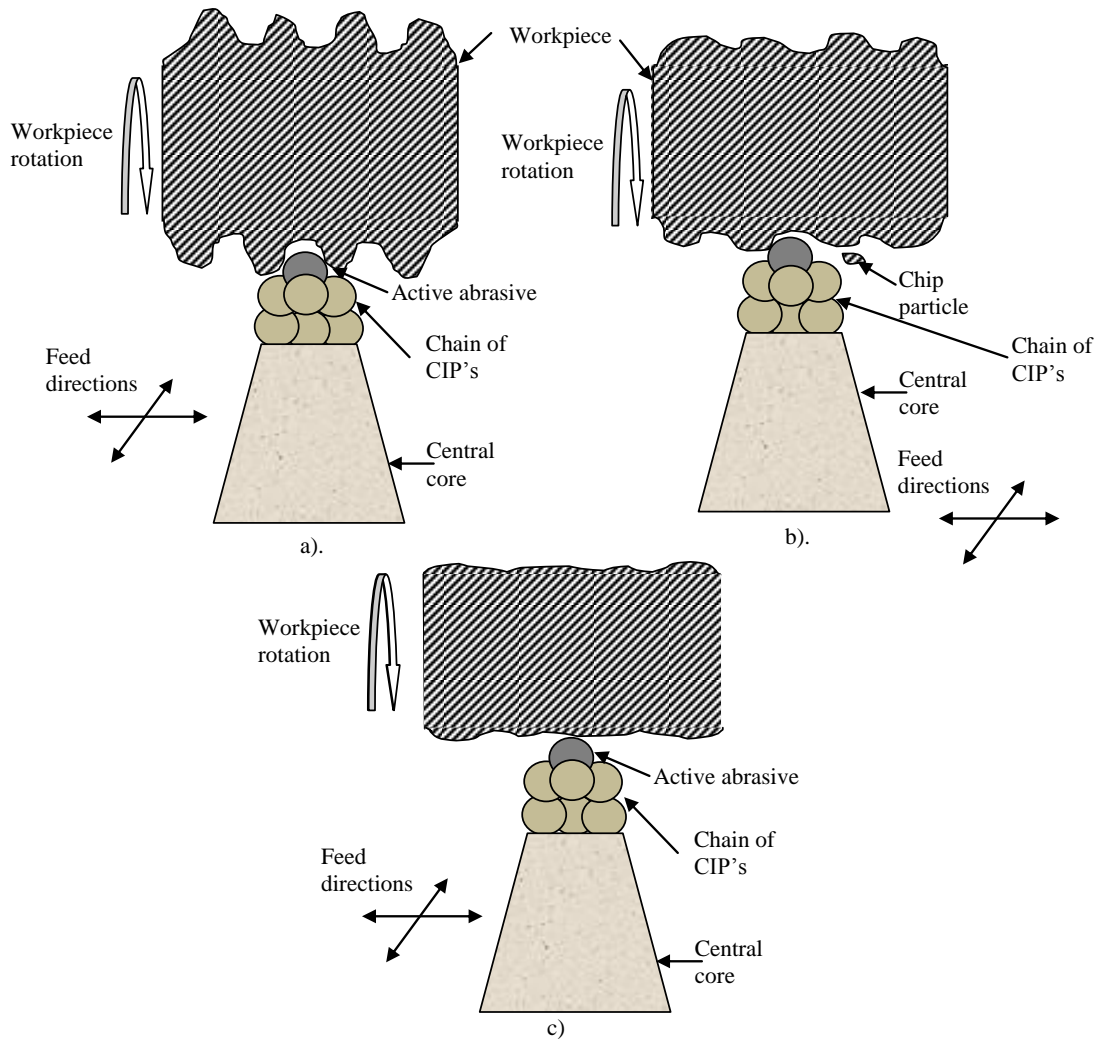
Schematic diagram of mechanism of material removal a) initial surface roughness peaks of workpiece and gripped CIPs with abrasive b). Chip removal in finishing c). Final roughness value after finishing
